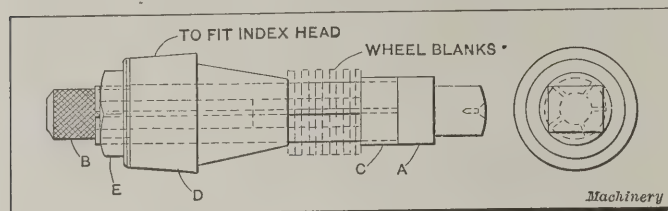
Arbor used on the Machine shown in Fig. 32 for Holding Brass Wheels
